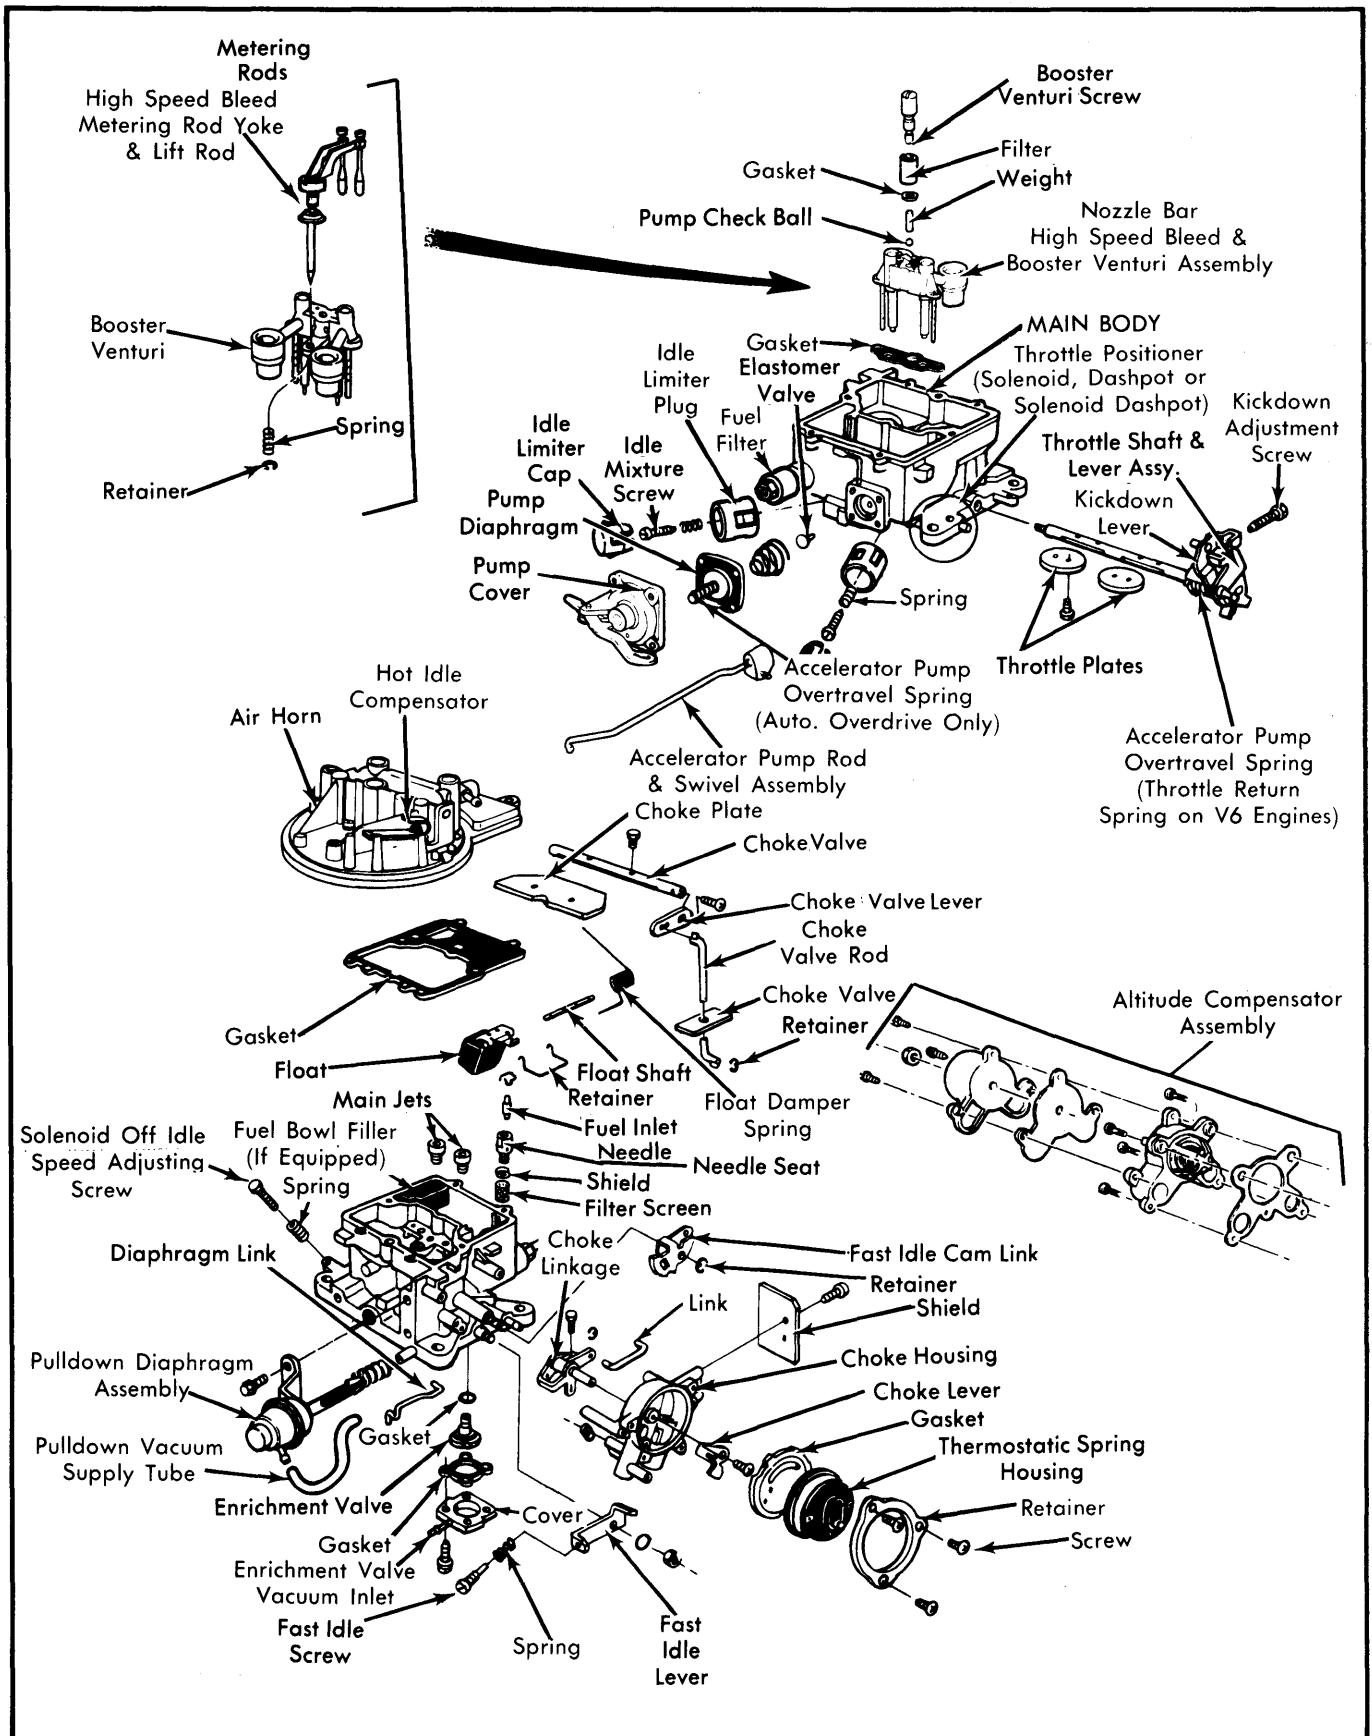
Exploded View of Motorcraft Model 2150 Carburetor Assembly
